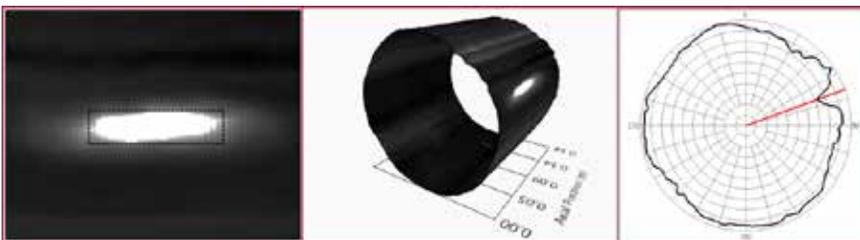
Real-time unrolled pipe C-scan display identifying the location of the 42-inch diameter pipe ID flaw and the seam weld.
